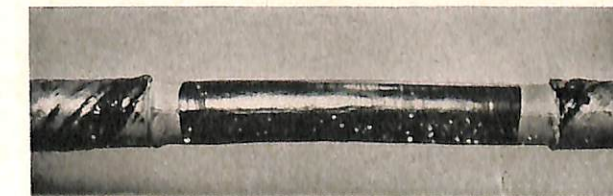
Completed mold of the vinylite jacket of the cable.
